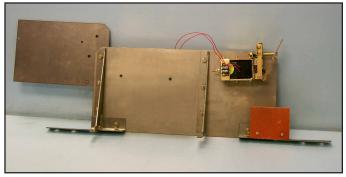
DTA Assembly Mounted to the DTA / Aux. CT Module Mounting Assembly.
